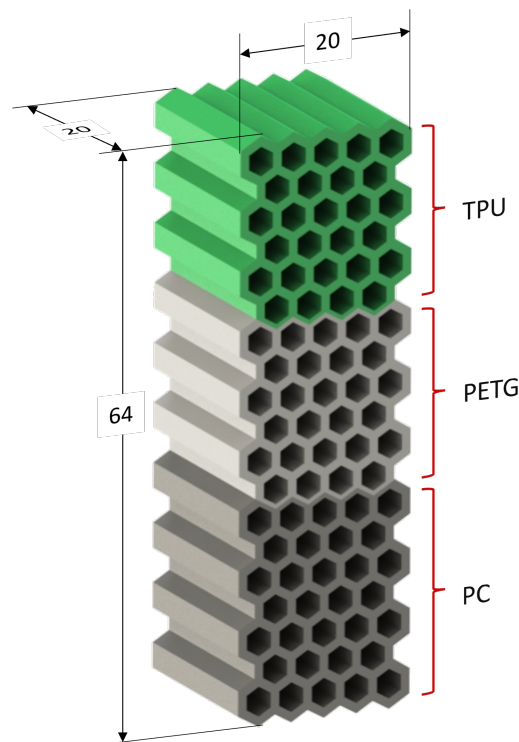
Dimensions (mm) of large honeycomb multi-material structure.
